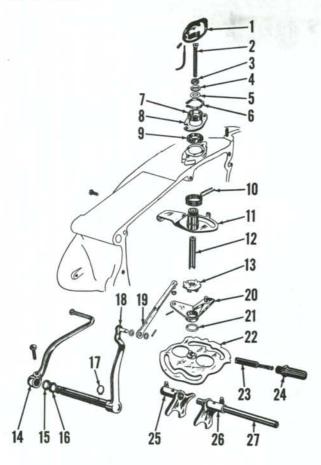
View of gear shift mechanism used on 250cc models. Other models are similar.
